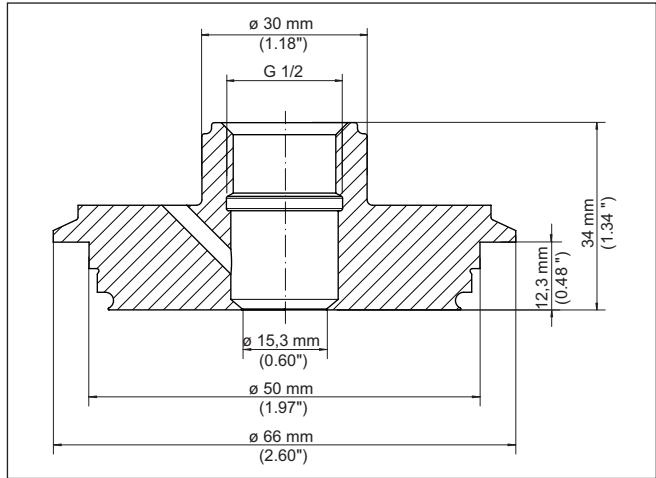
Dimensions hygienic adapter G $\frac{1}{2}$ (DIN 3852-X) on Varivent Form N DN 40 ... DN 100 - Cone seal
